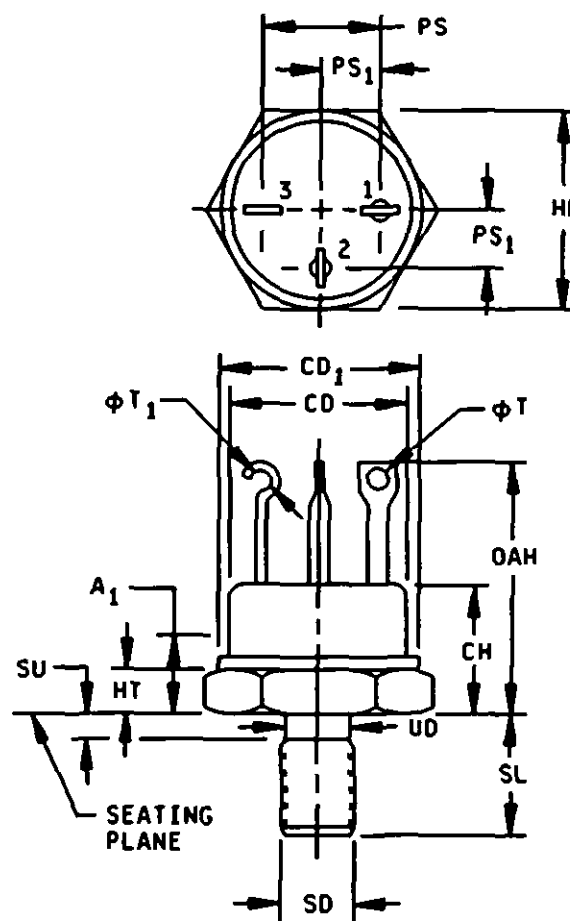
Physical dimensions of T-7 family. (Similar to T0-61)
